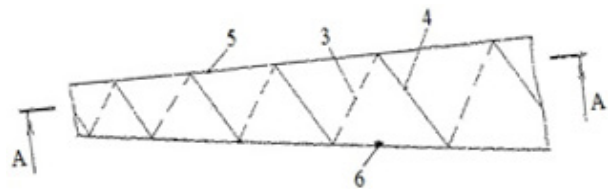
Scheme of weakened zones of trapezoidal bands, from which the screw body the rotary of kiln is assembled
